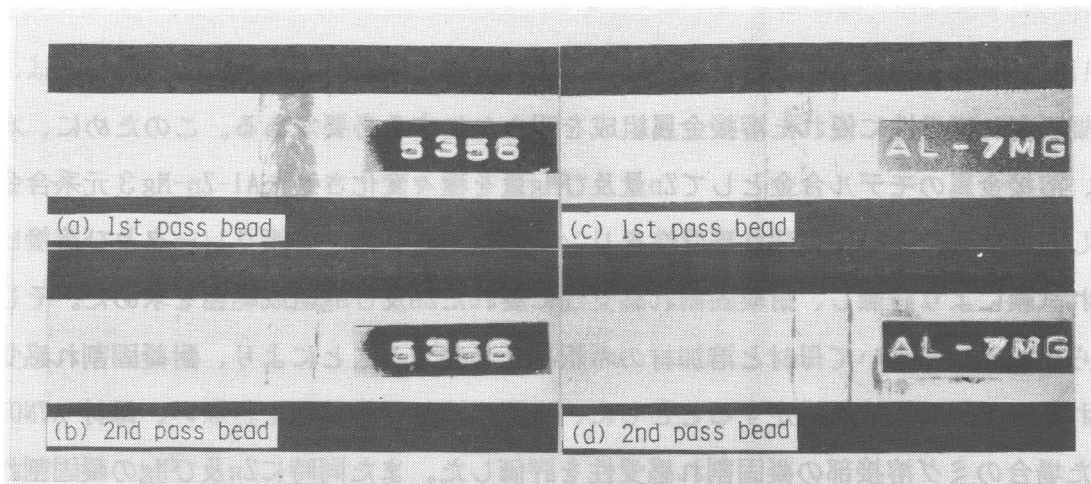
Appearance of penetrant tested specimens after SCC test for A7N0 GMA welded joint with A5356 and Al-7%Mg wires after natural aging for 30d.
